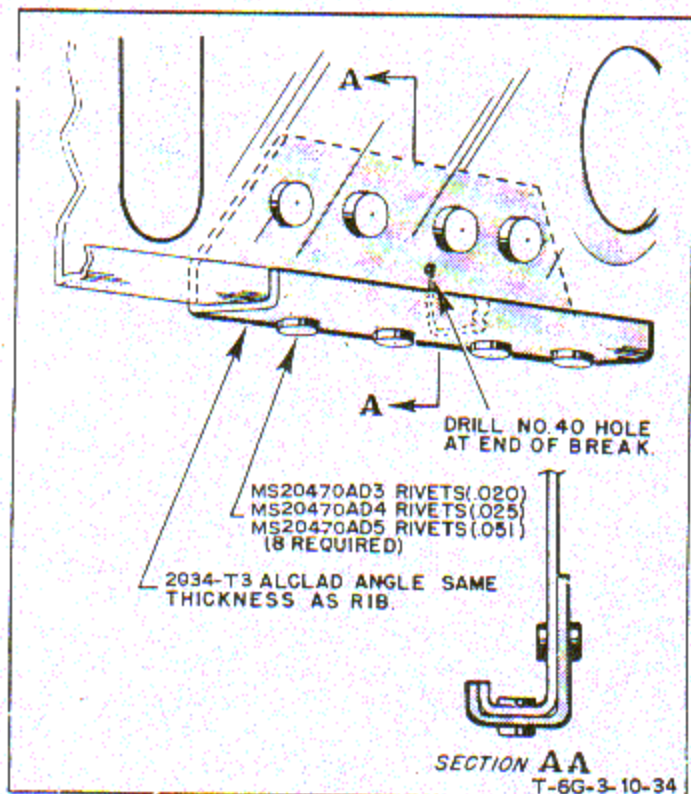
Typical Rib Flange Repair Where Flange Is Not Riveted to Skin
